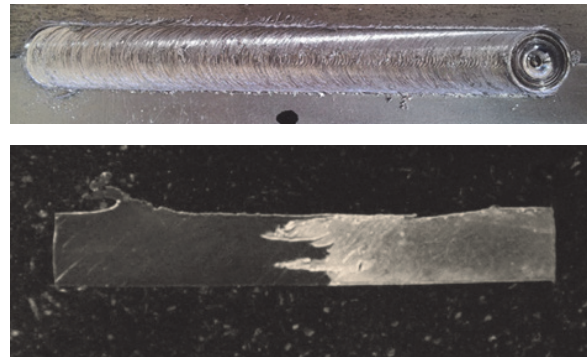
FSWed butt joint weld and section macrography (2 mm thick AA6016 RS and AZ31B AS)
